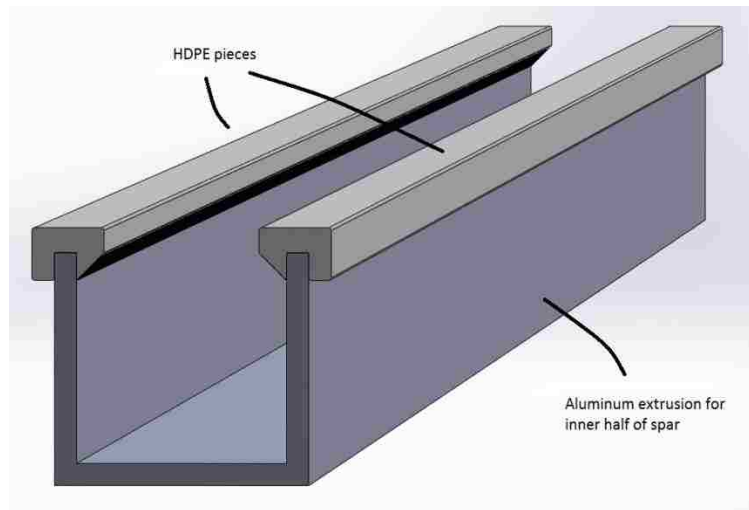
Aluminum extrusion and HDPE pieces for inner half of spar
